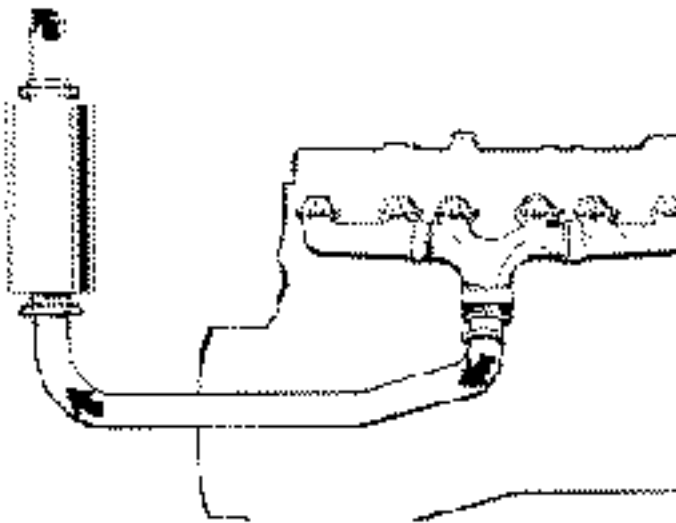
Typical exhaust system showing exhaust manifold, exhaust pipe, muffler, and extension. (Courtesy of Cummins Engine Company Inc.)
